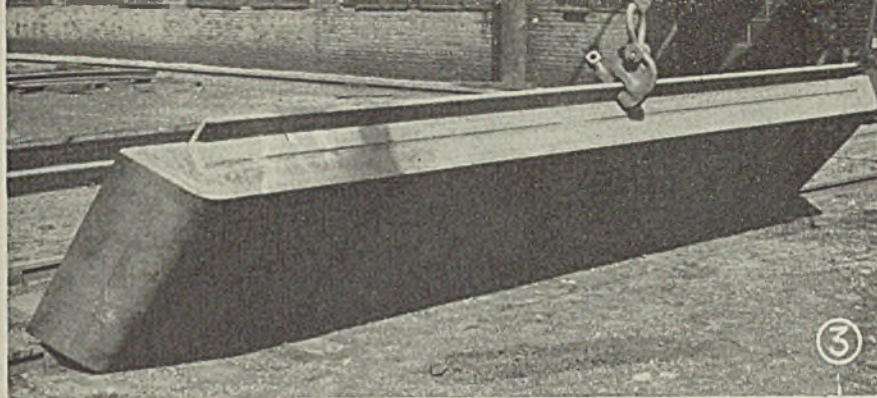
Construction time for this 18-foot lead pan was short, for it consists of sections of standard plate thicknesses and rolled angles, flame cut and arc welded. Skip welding is important in such structures as this
